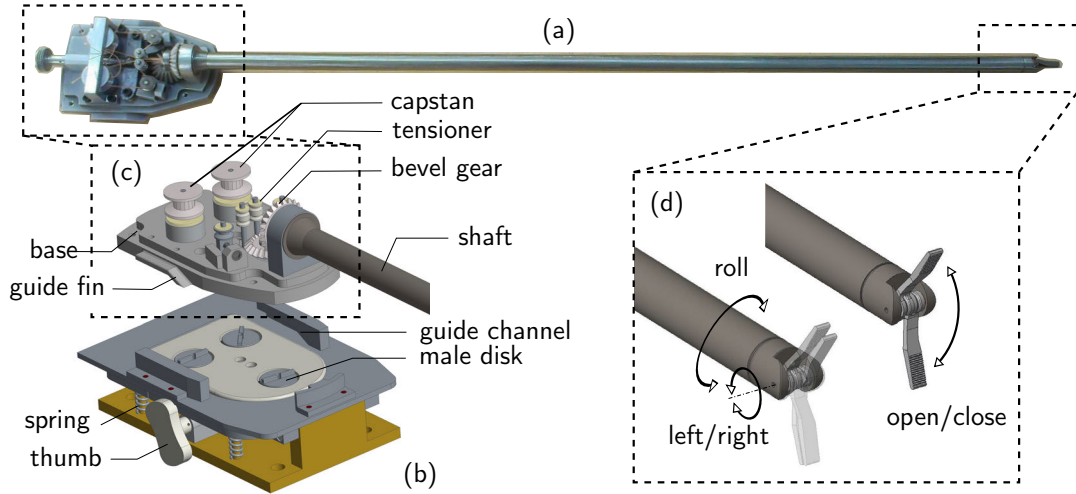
Surgical tool and its mechanical interface: (a) Realized prototype (b) Interface unit with quick-release mechanism (c) Tool head (d) Tool tip; exhibiting the three possible movements.
